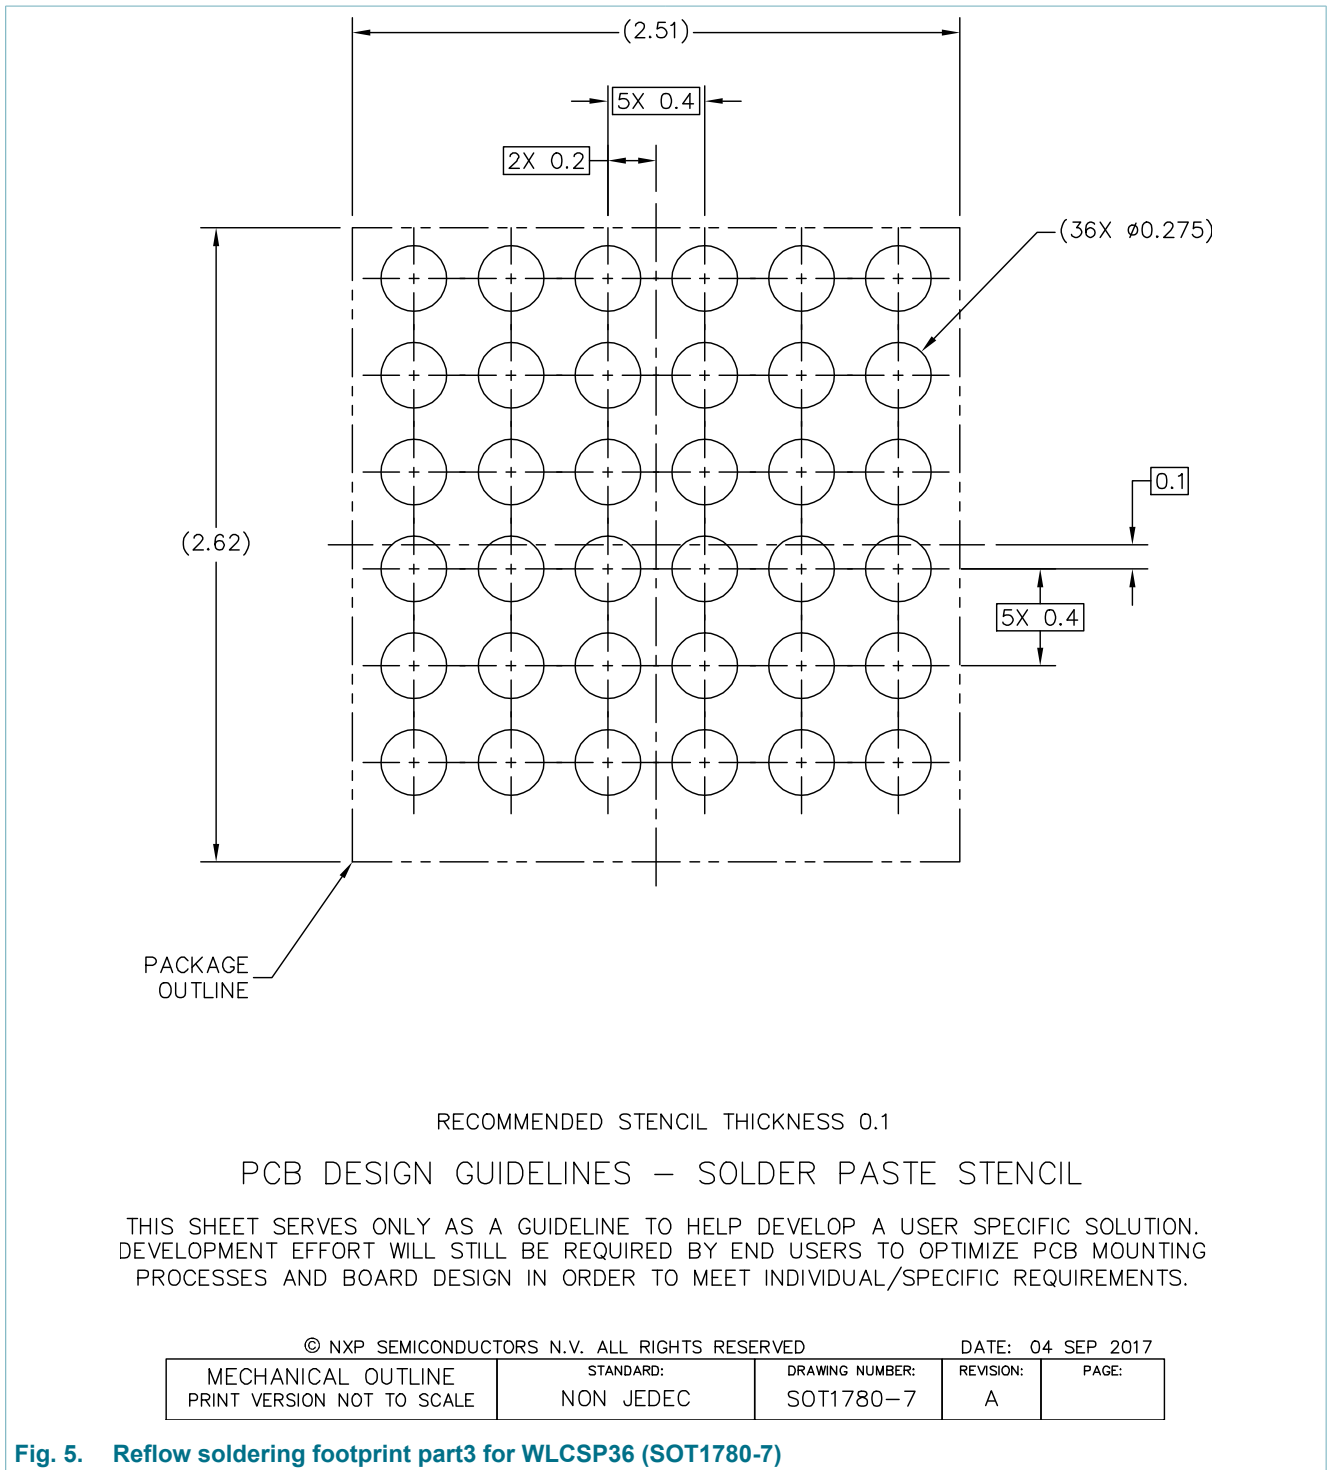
Reflow soldering footprint part3 for WLCSP36 (SOT1780-7)
